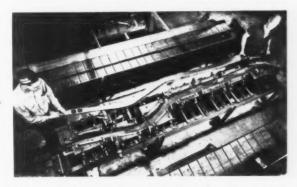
Mechanical clamping of the side rail stampings assures close fits essential for welding.
